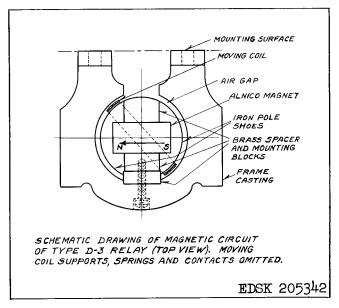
Magnetic Circuit of d'Arsonval Type de Contact Making Milliammeter.
